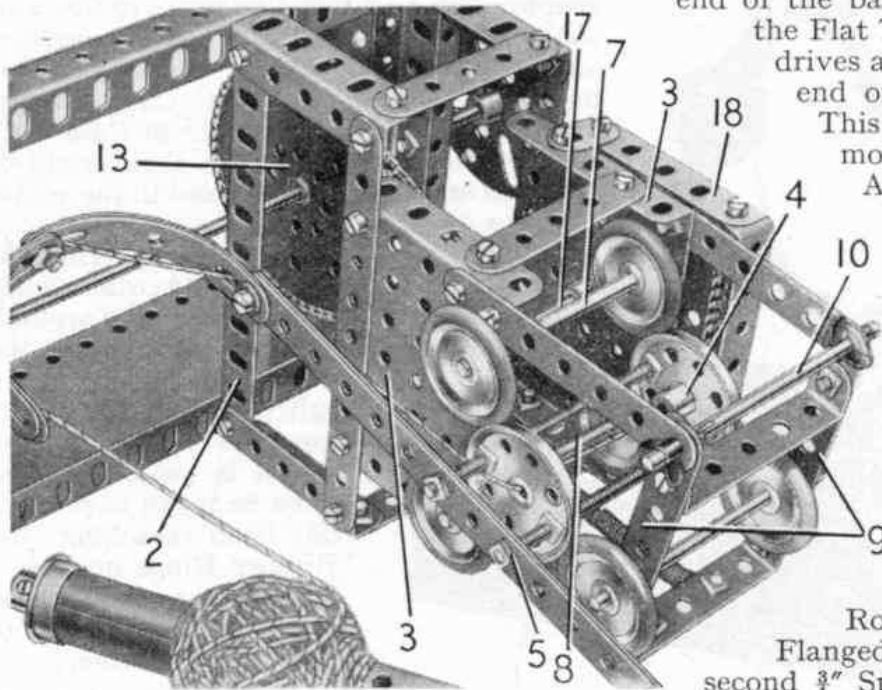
A close-up of the novel friction-drive arrangement that rotates the winding arm.
